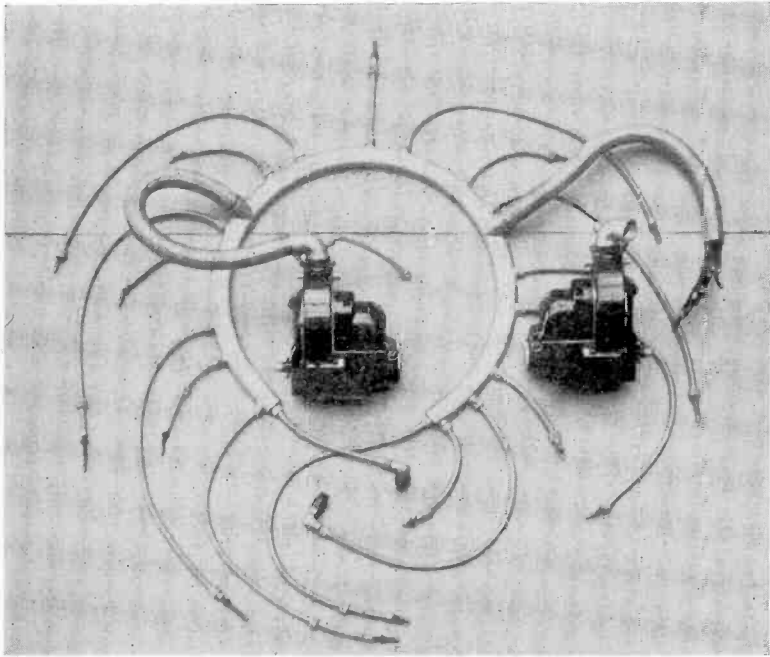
Commercial shielding assembly for Pratt-Whitney Wasp engine, patterned after assembly shown in Fig. 14.
